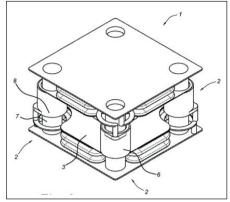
This image illustrates a perspective view of the invention with two opposing membranes, each being driven by two linear motors and additional compliance increasing magnet assemblies.
